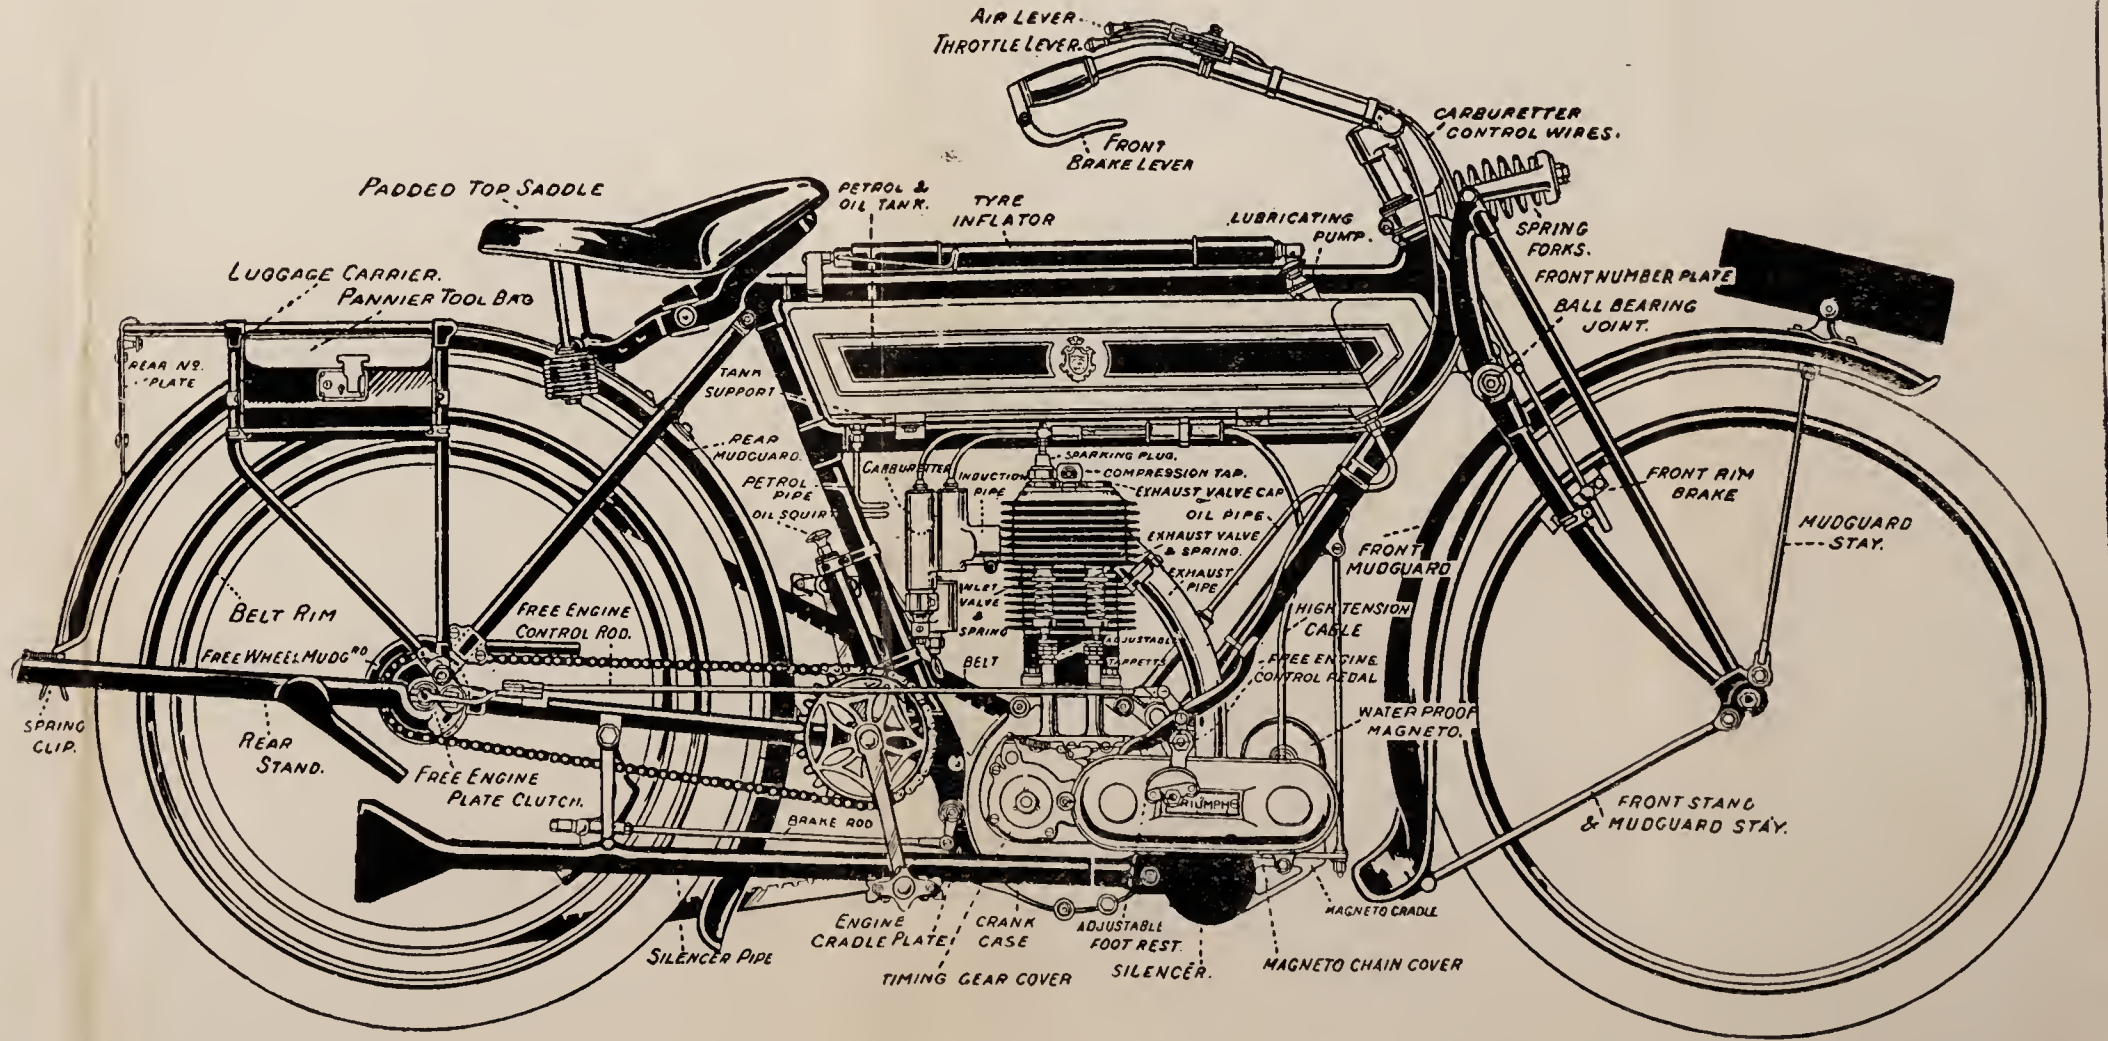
Showing the Important Parts of the Triumph Single Cylinder Motorcycle, a Typical English Design.
